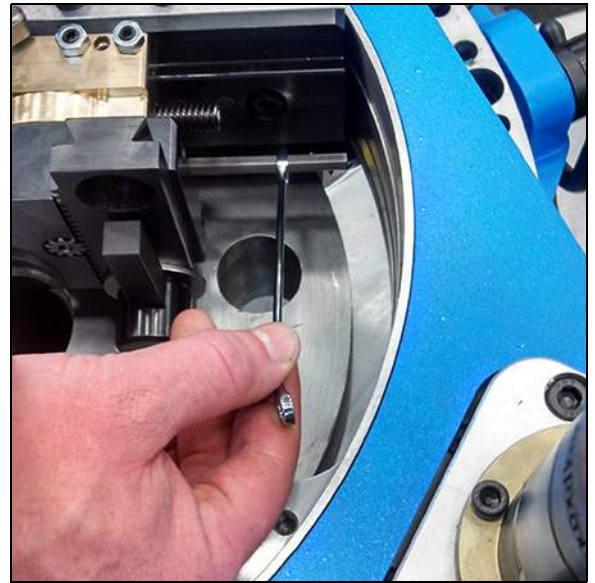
TURN THE AXIAL FEED DRIVE SHAFT TO ADJUST TOOL HEIGHT (FF1200 SHOWN)
